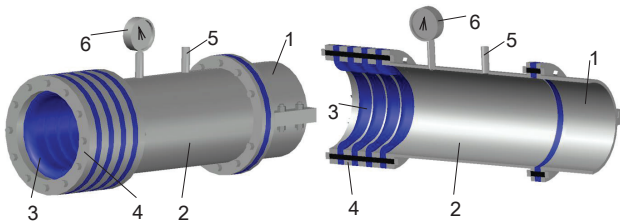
Sealing system: 1 – clamp; 2 – pipe; 3 – seal cuff; 4 – flange; 5 – pipe for connecting the compressor; 6 – manometer
